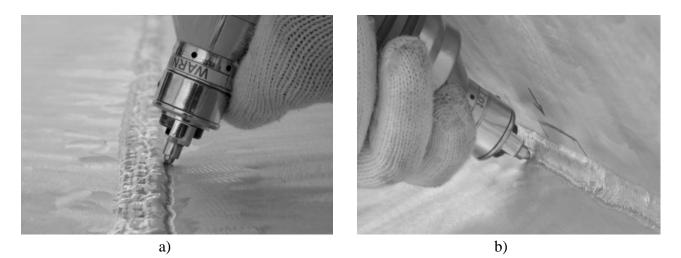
The process of UIT/UP of butt weld (a) and fillet weld (b) for prevention of initiation and propagation of fatigue and corrosion cracking of large aluminum welded panels
